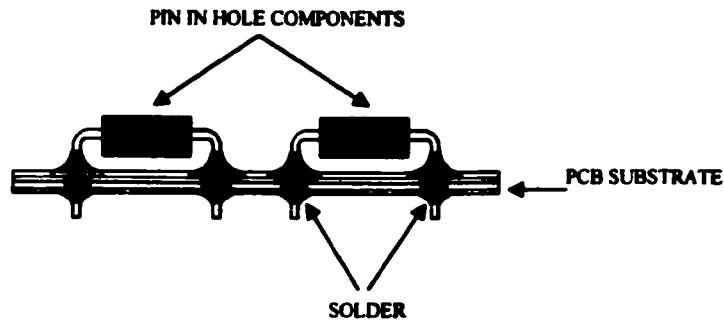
Pin through hole connection of a microelectronic component to a printed wiring board [1].
